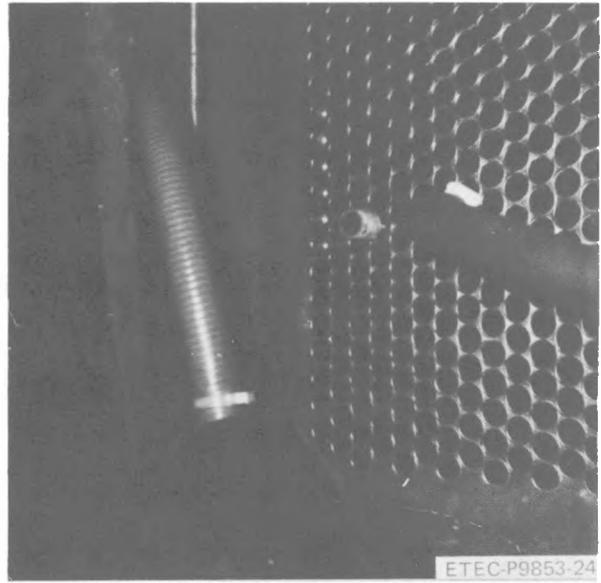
Loose Outlet Bottom Instrumented Tube Hose
